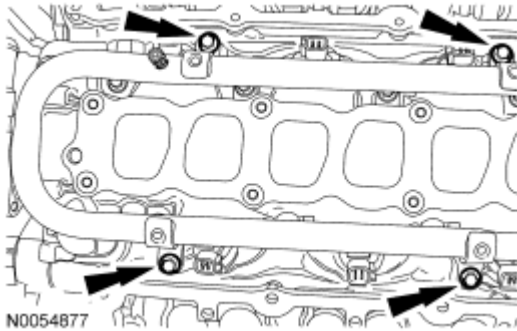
Locating Fuel Rail And Injectors & Bolts
